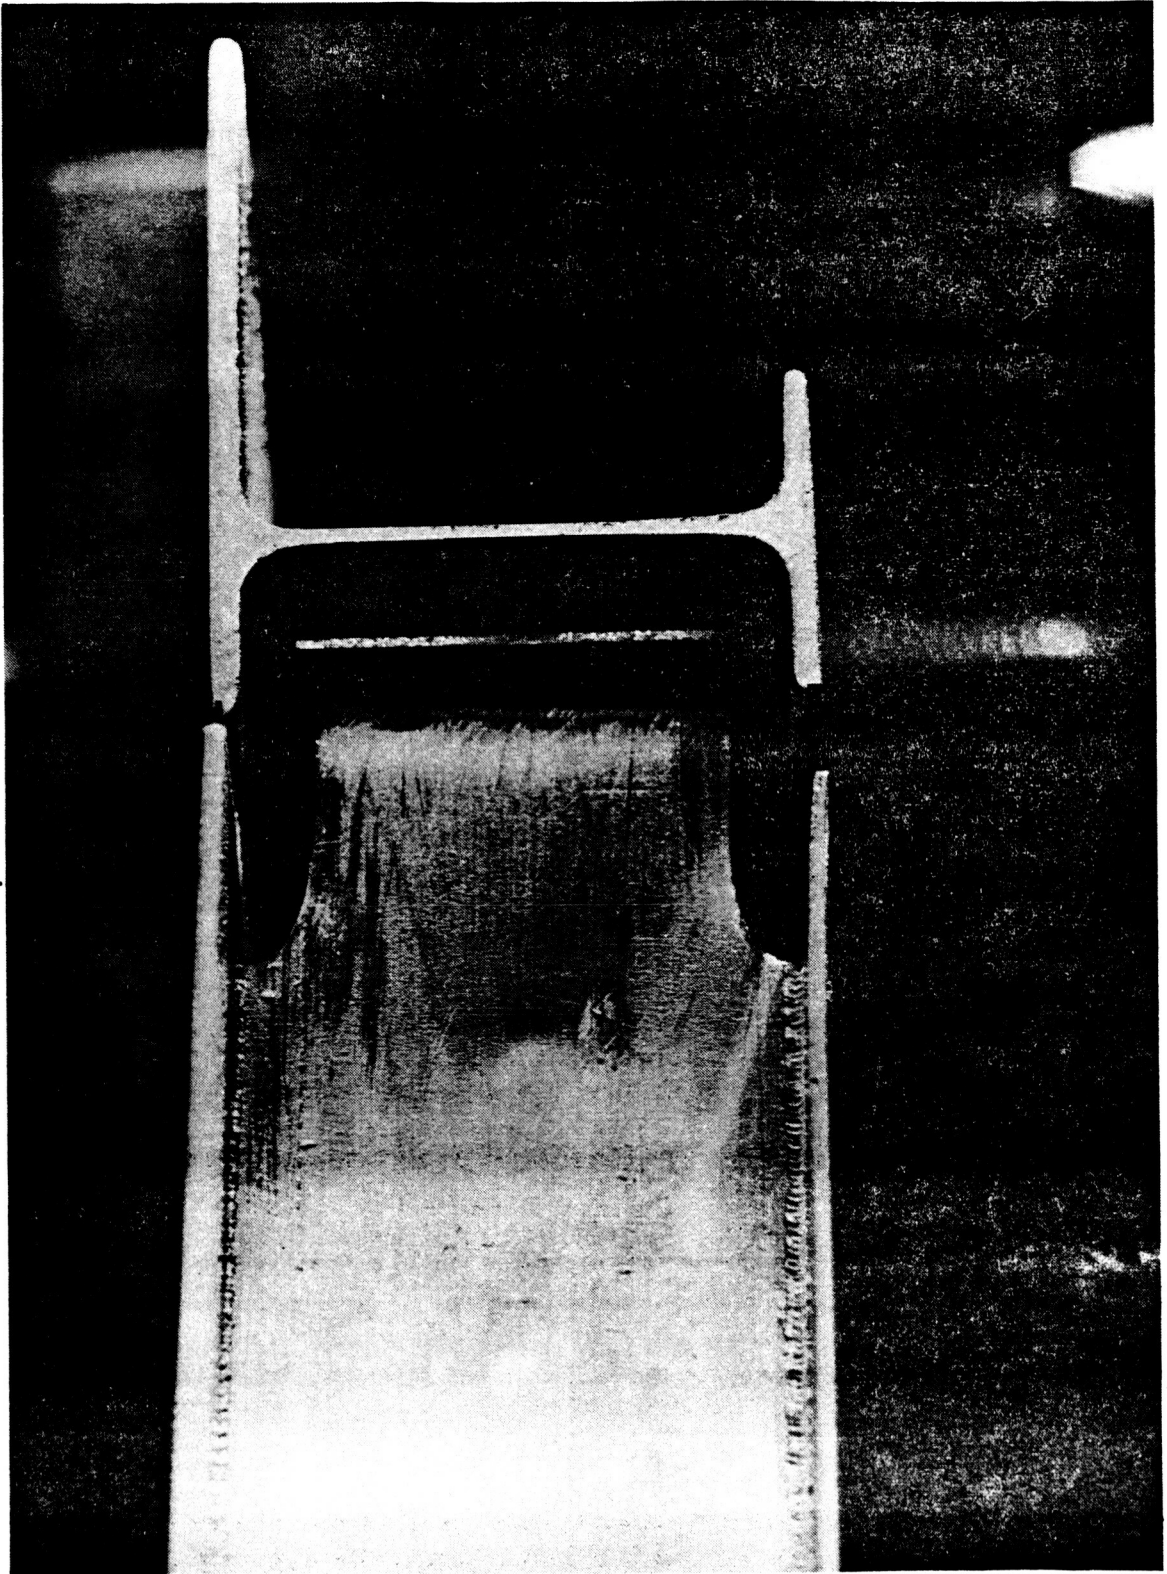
Details of Closure Welds — Welded Panel to Beam — Tee-Stiffened Cb-752 Heat Shield Panel (Photo No. 128069B)
